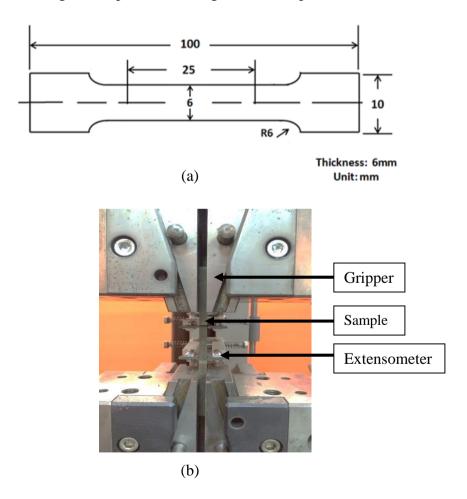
(a) Tensile test sample size and dimension, and (b) tensile testing configuration.
